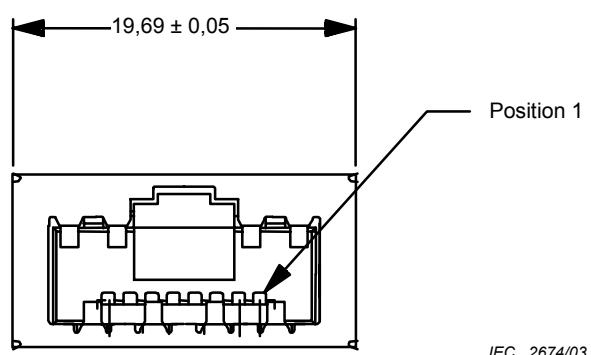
Side view fixed board connector (XB) right angle (version 2)
